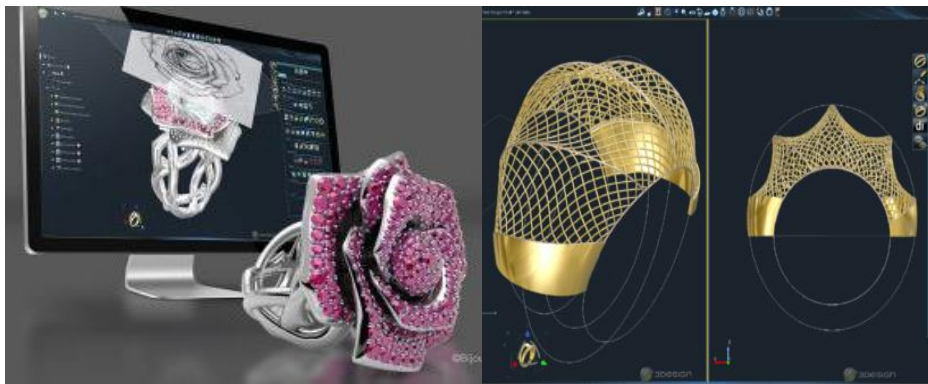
An example of designing metal jewelry pieces using the 3Design software.
